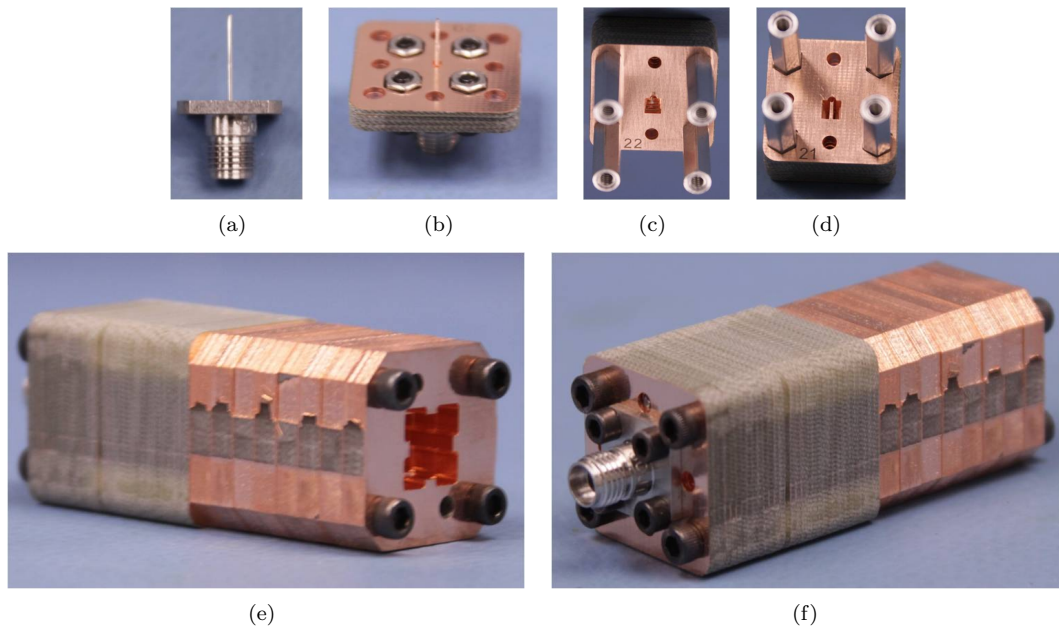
Assembly of the antenna with end launch. (a) Probe. (b) First four layers secured by machine screws. (c) TEM line secured by machine screws and hex standoffs. (d) First layer of waveguide section soldered to center pin. (e) Assembled antenna, aperture view. (f) Assembled antenna, connector view.
